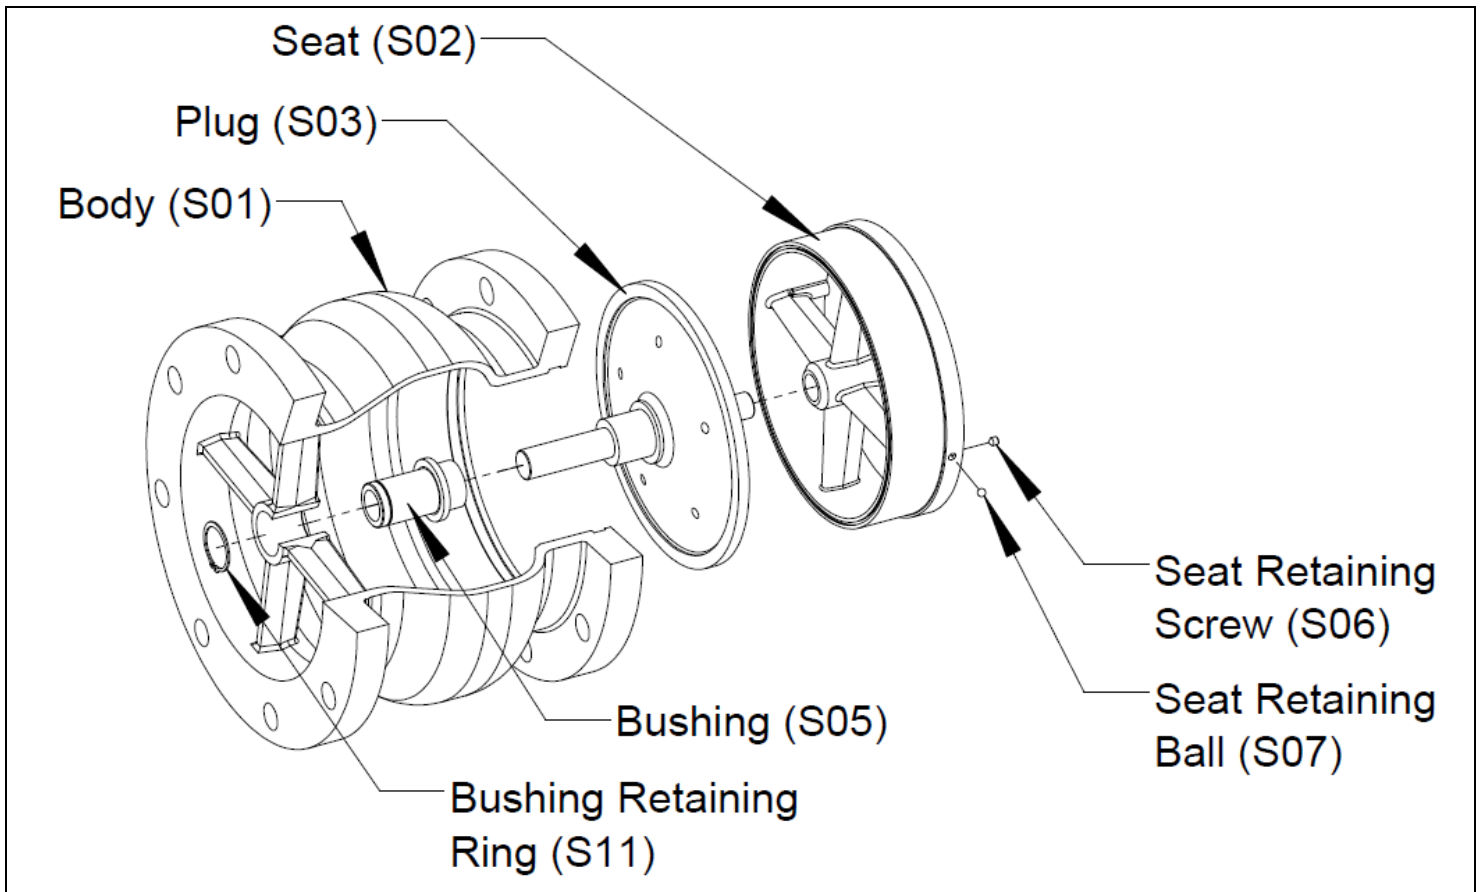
CSV-1600A Surge Check Valve (Exploded View)
